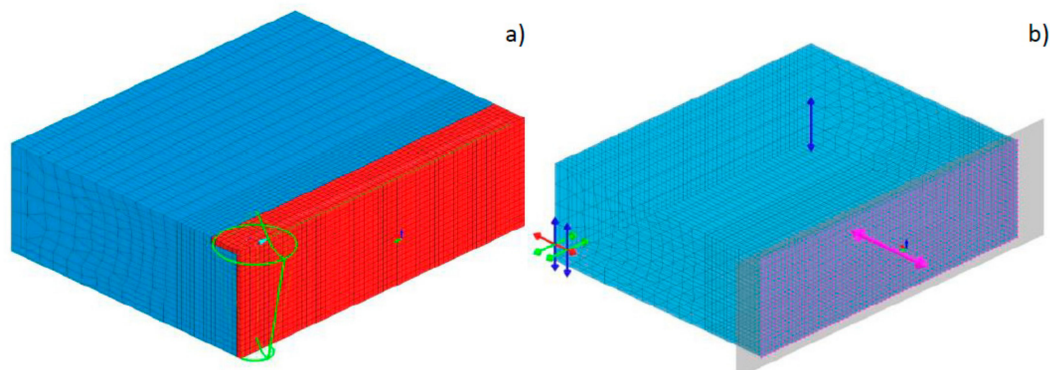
View (a) of the symmetrical three-dimensional model of the laser bead-on-plate welding process together with a conical model of the heat source and the “LOAD” area, and (b) boundary clamping conditions.
